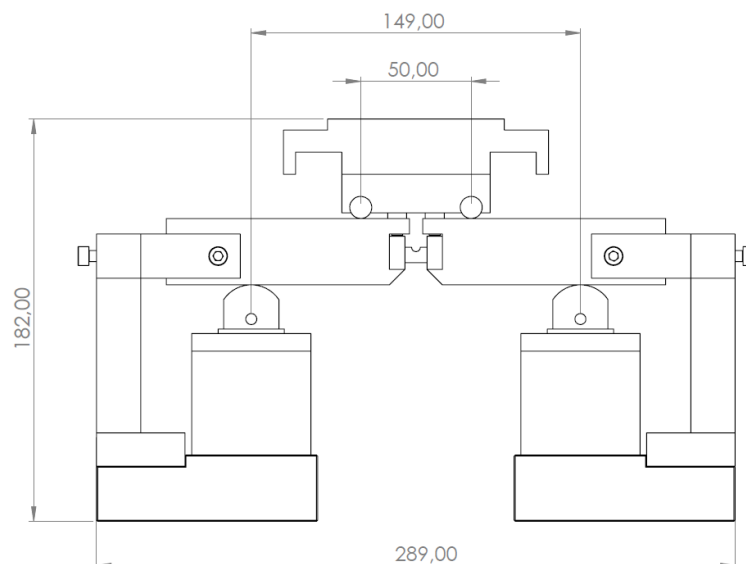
Assembly of the designed gripping mechanism. Units in mm.
